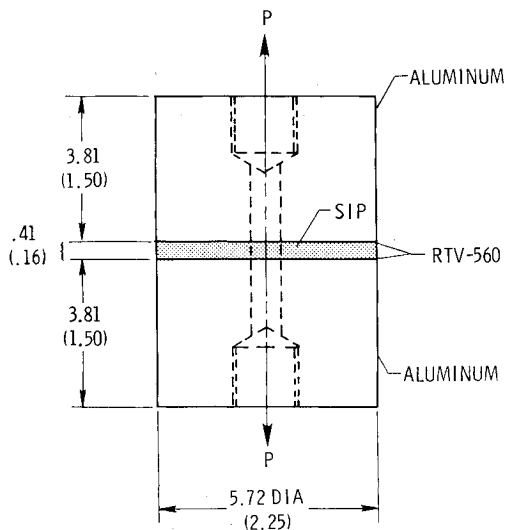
Detail of SIP poker-chip test specimens. Dimensions given in cm (in.).
